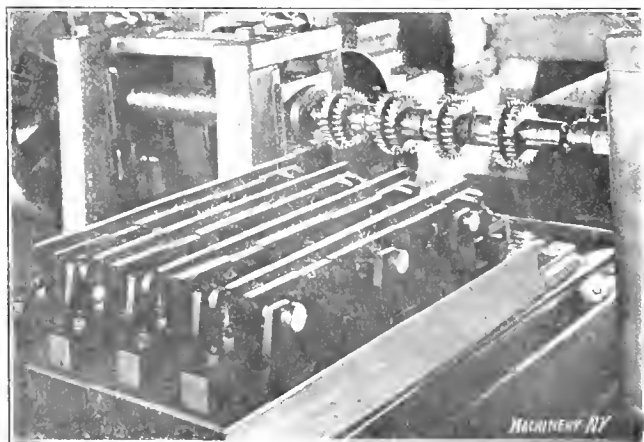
View of Jig on Milling Machine, showing Clearance between it and the Cutters
